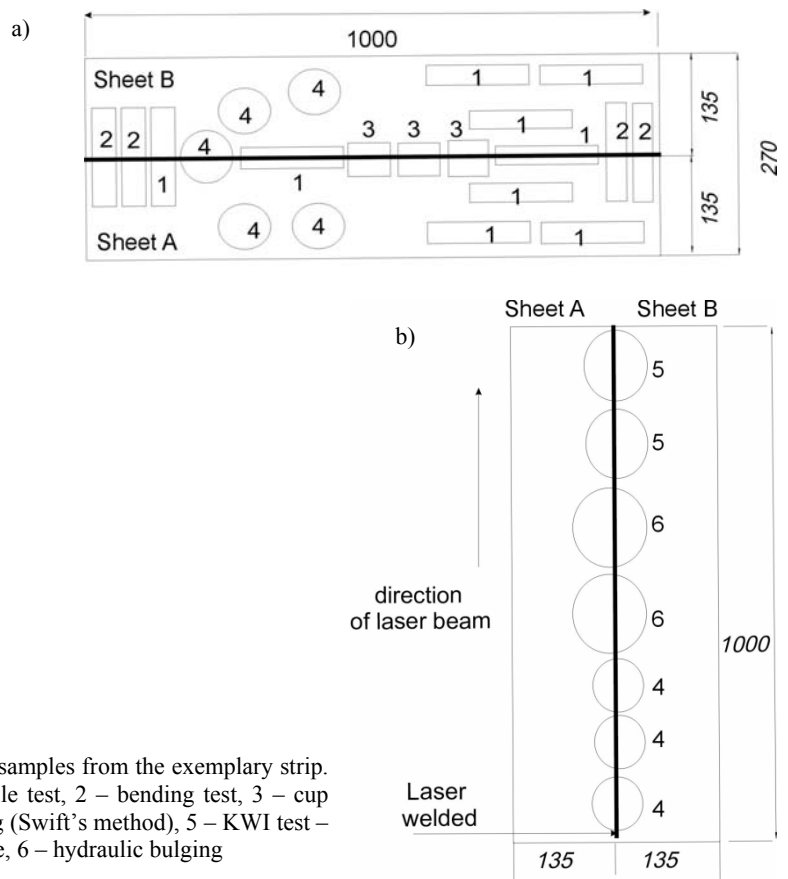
Pattern of taking samples from the exemplary strip. Tests notation: 1 – tensile test, 2 – bending test, 3 – cup drawing test, 4 – cupping (Swift’s method), 5 – KWI test – bugle forming of the hole, 6 – hydraulic bulging
